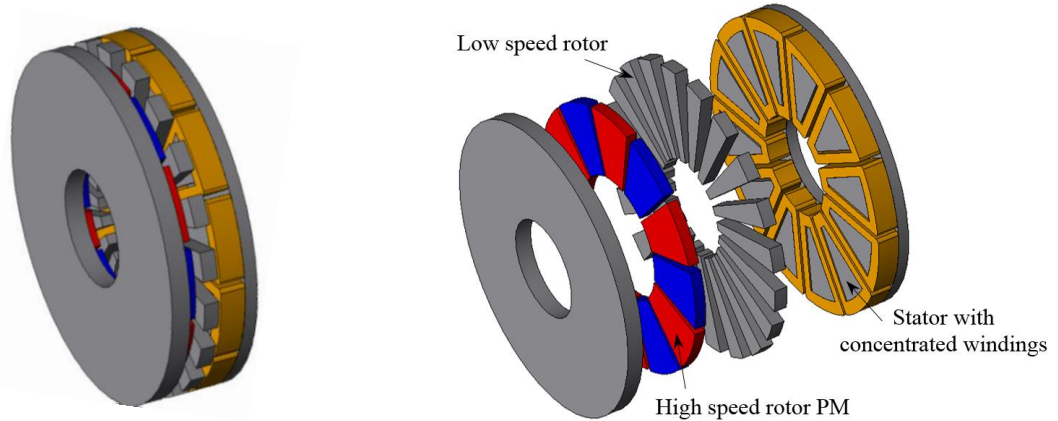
Magnetic geared machine presented in [NIG12a].
